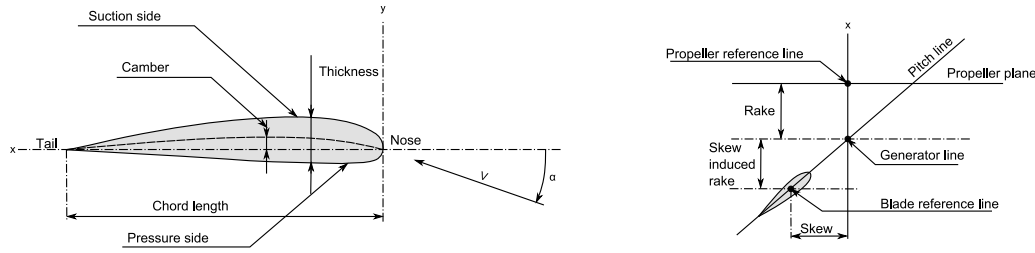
geometry of a propeller blade section (left) and a cylindrical cross section (right)
